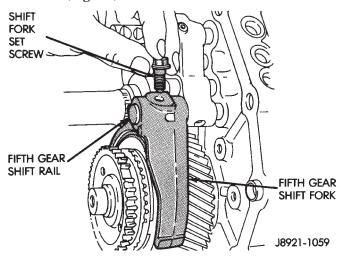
Remove Fifth Gear Shift Fork Retainer Bolt
